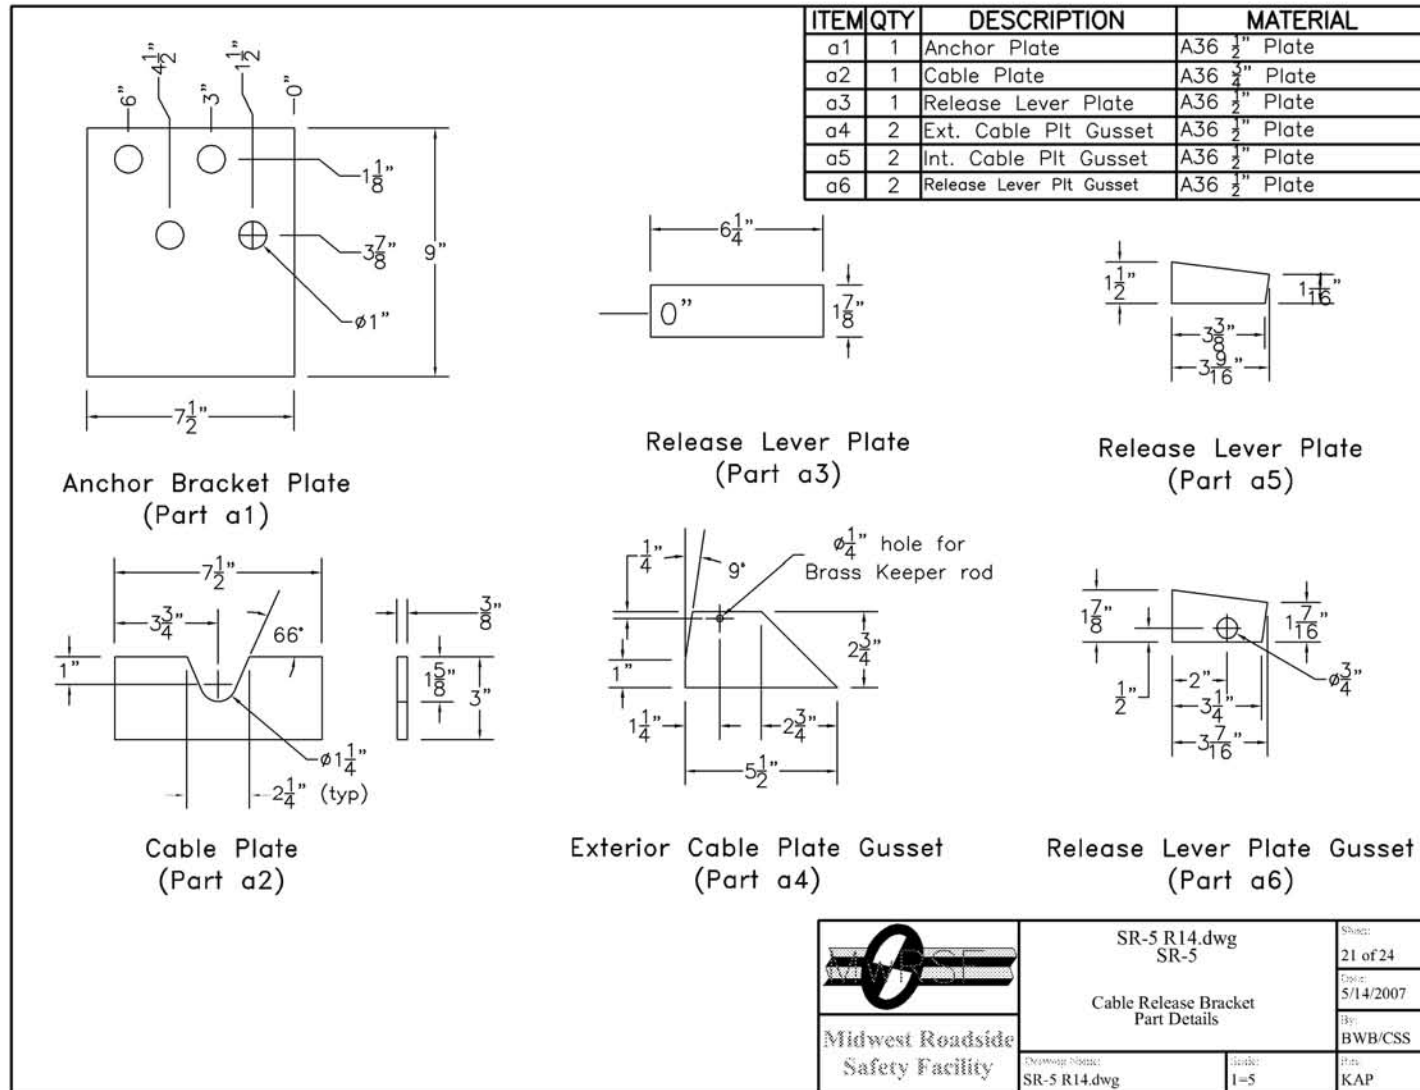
Cable Release Bracket Details (English), Test SR-5
